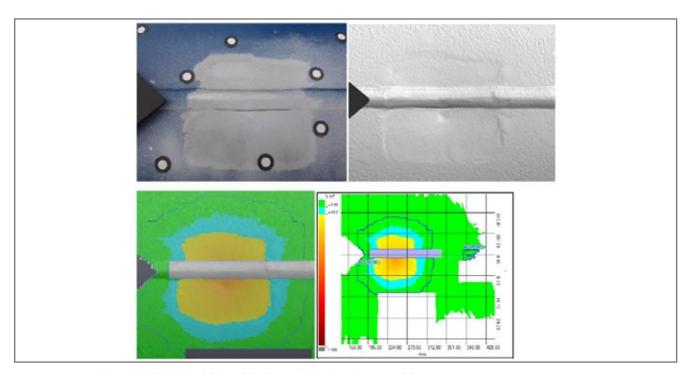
Picture and laser scan of a combined defects (plain dent with a notch on the seam weld) E425
